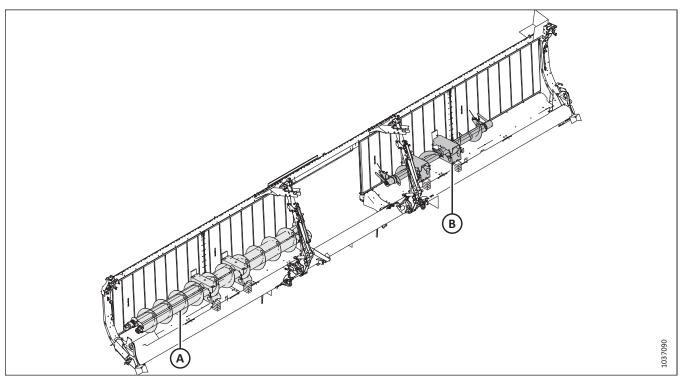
Triple Reel Header with Three-Piece Upper Cross Auger (UCA)
